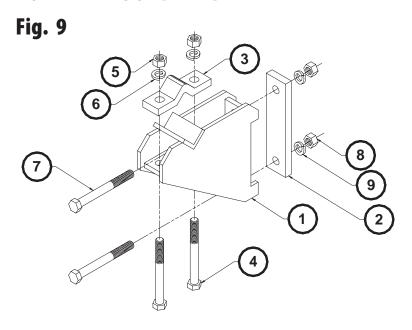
897500AUX Auxiliary Tool Bar Adapter 7" x 5" 897700AUX Auxiliary Tool Bar Adapter 7" x 7"
